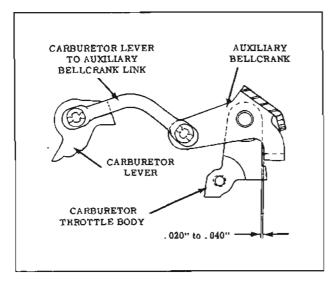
Carburetor Lever to Auxiliary Bellcrank Adjustment (4 Barrel)
